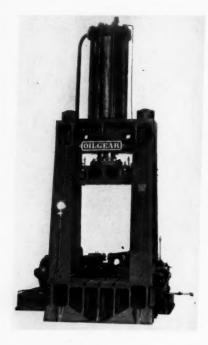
150-ton hydraulic press for deep drawing of metal. Note the single hand lever at the right of the machine which is employed for controlling the movement of the platen
